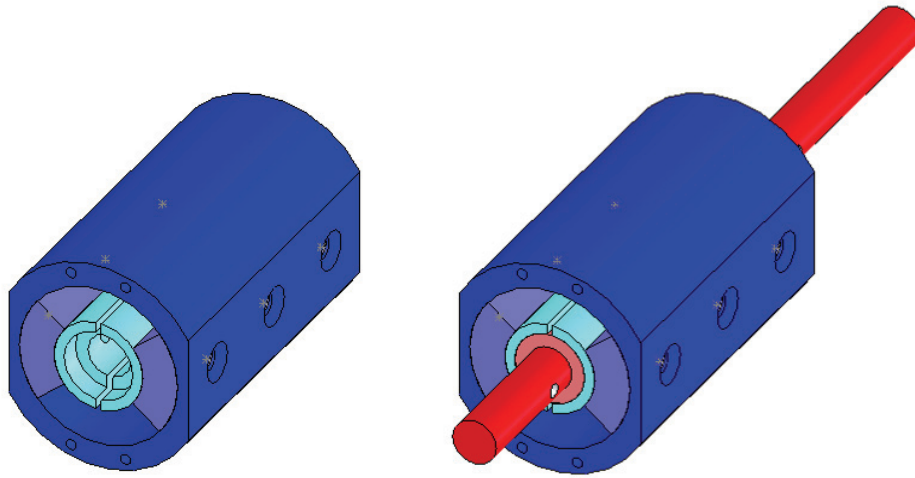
Modified core 3 to accommodate ball bearing to support shaft.
